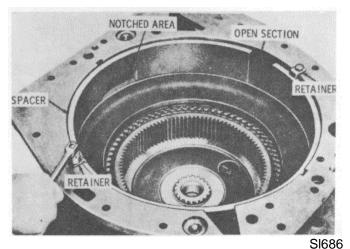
Installing Splitter-Overdrive Clutch Backplate Spacer Retainers
